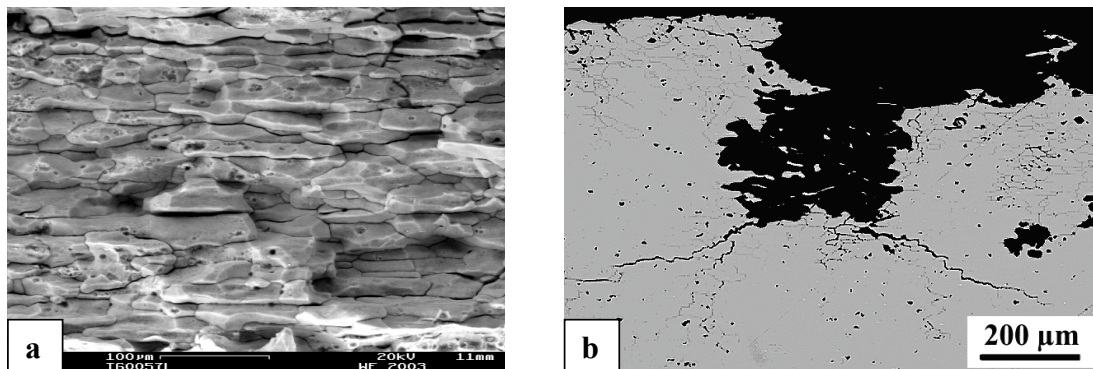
Fractographic (a) and metallographic (b) examinations of bent-beam specimens of dissimilar 2024A-T3/6056-T6 FSW joints which were alternately immersed in 3.5% NaCl solution, showing (a) intergranular fracture (specimen failed after 30 days of exposure) and (b) pitting and intergranular corrosion in the heat affected zone of 2024A.
